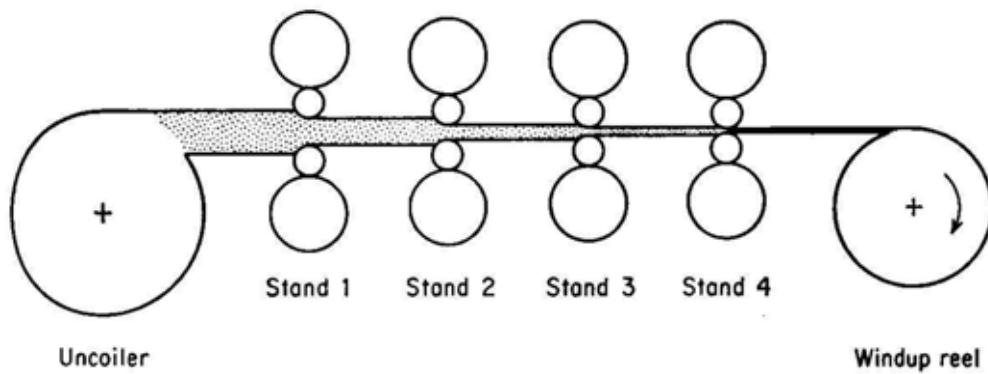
Schematic drawing of strip rolling on a four-stand continuous mill.
